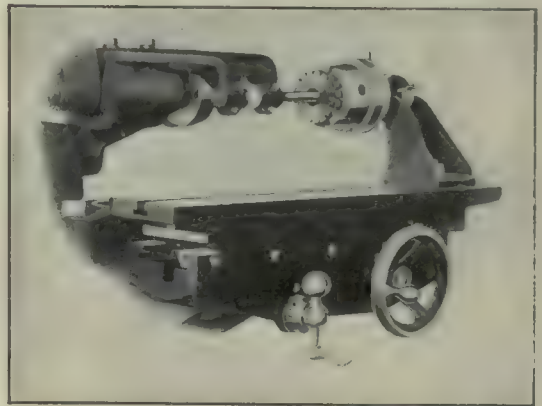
ARRANGEMENT FOR INTERNAL GRINDING
